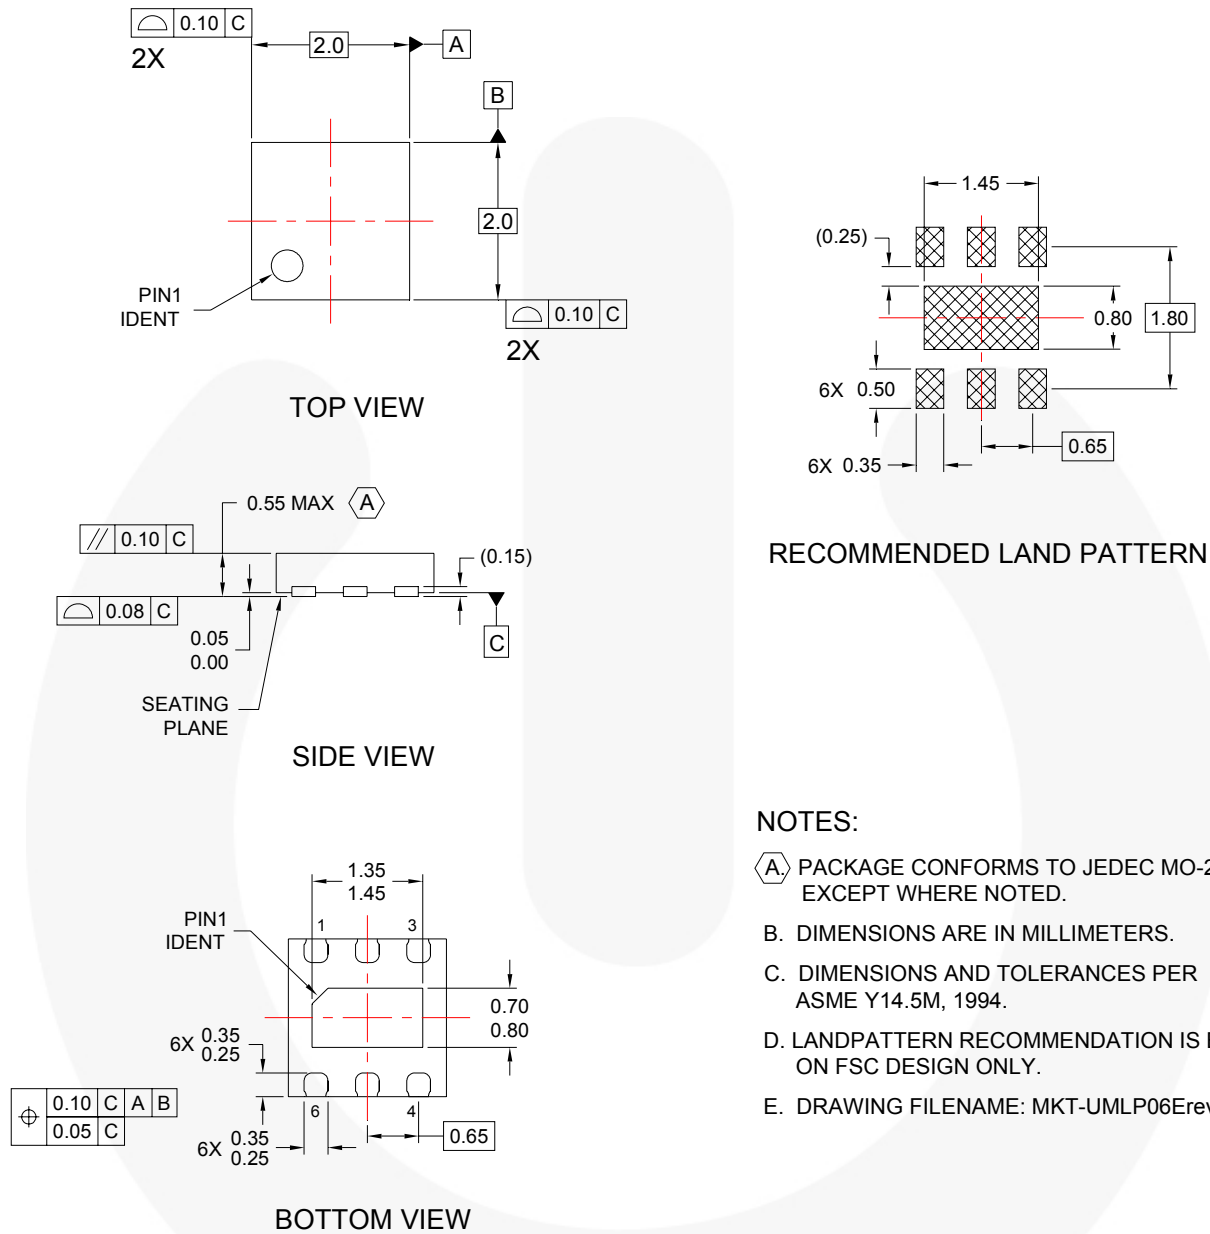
6-Lead, Ultra-Thin Molded Leadless Package (UMLP)
